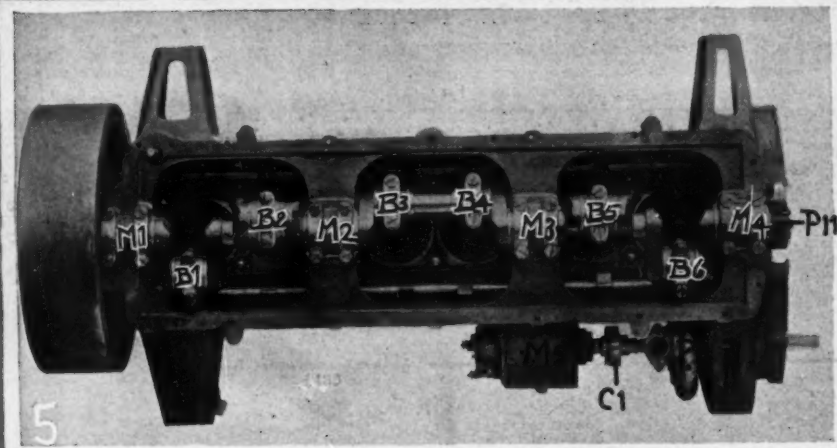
Six-Sixty motor turned upside down, with lower half removed
